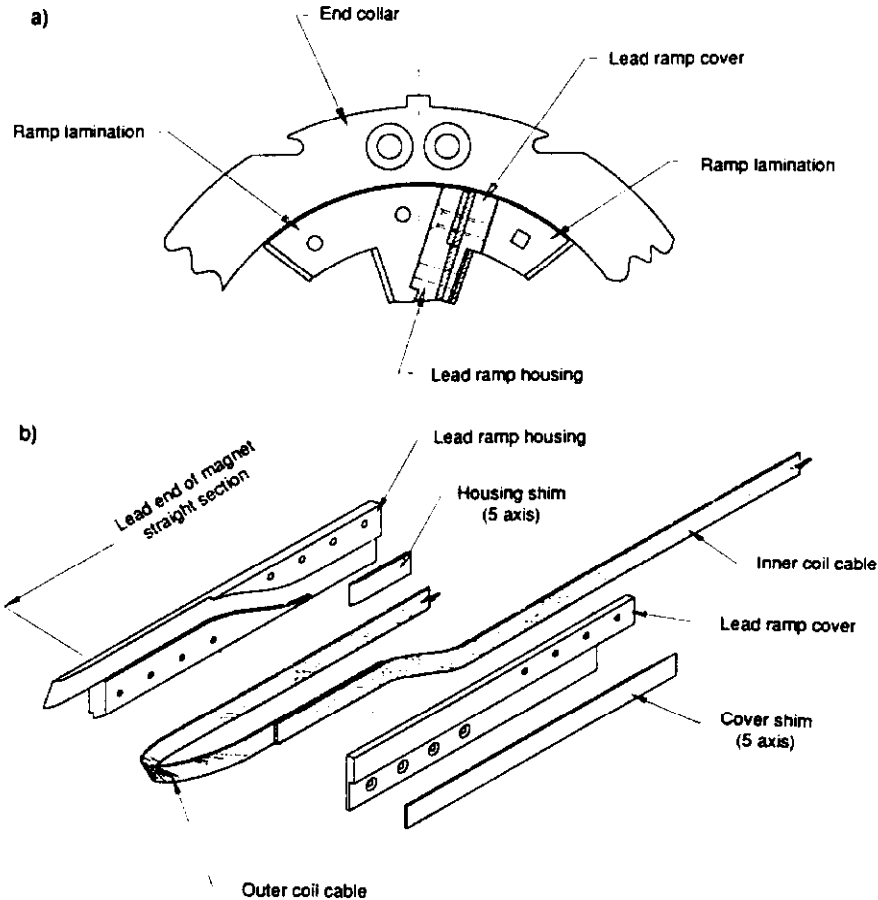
Detailed design of the ramp-splice between the inner and outer layers of a BNL 4-cm-aperture, 17-m-long collider dipole magnet coil: a) cross-sectional view, b) exploded view.
